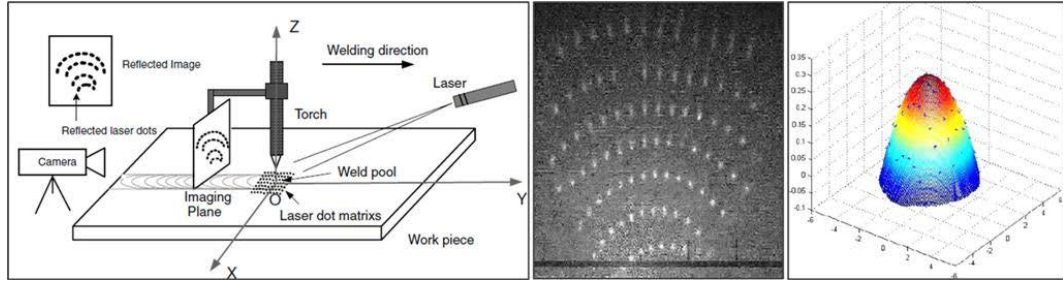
3D sensing system, captured image and the reconstructed 3-D weld pool
